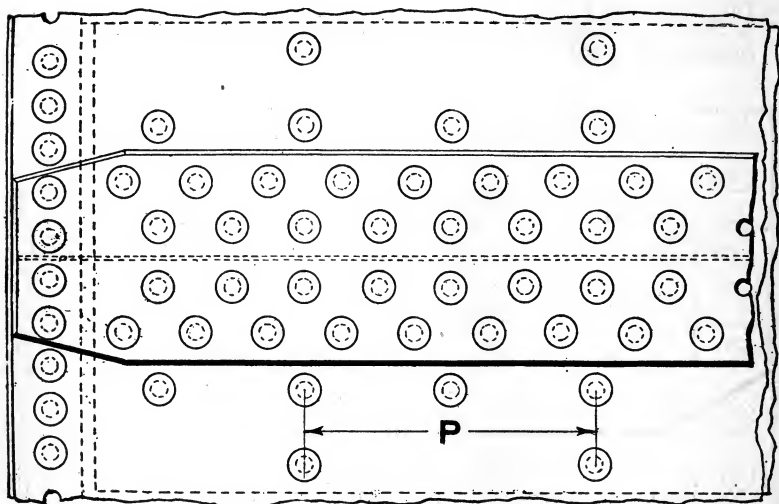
,870.—Example of butt and double strap joint, quadruple riveted.
